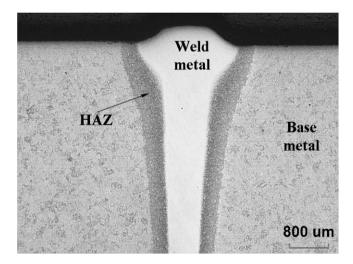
Typical aspects for EBW pool of 15 mm welded plate before PWHT.
